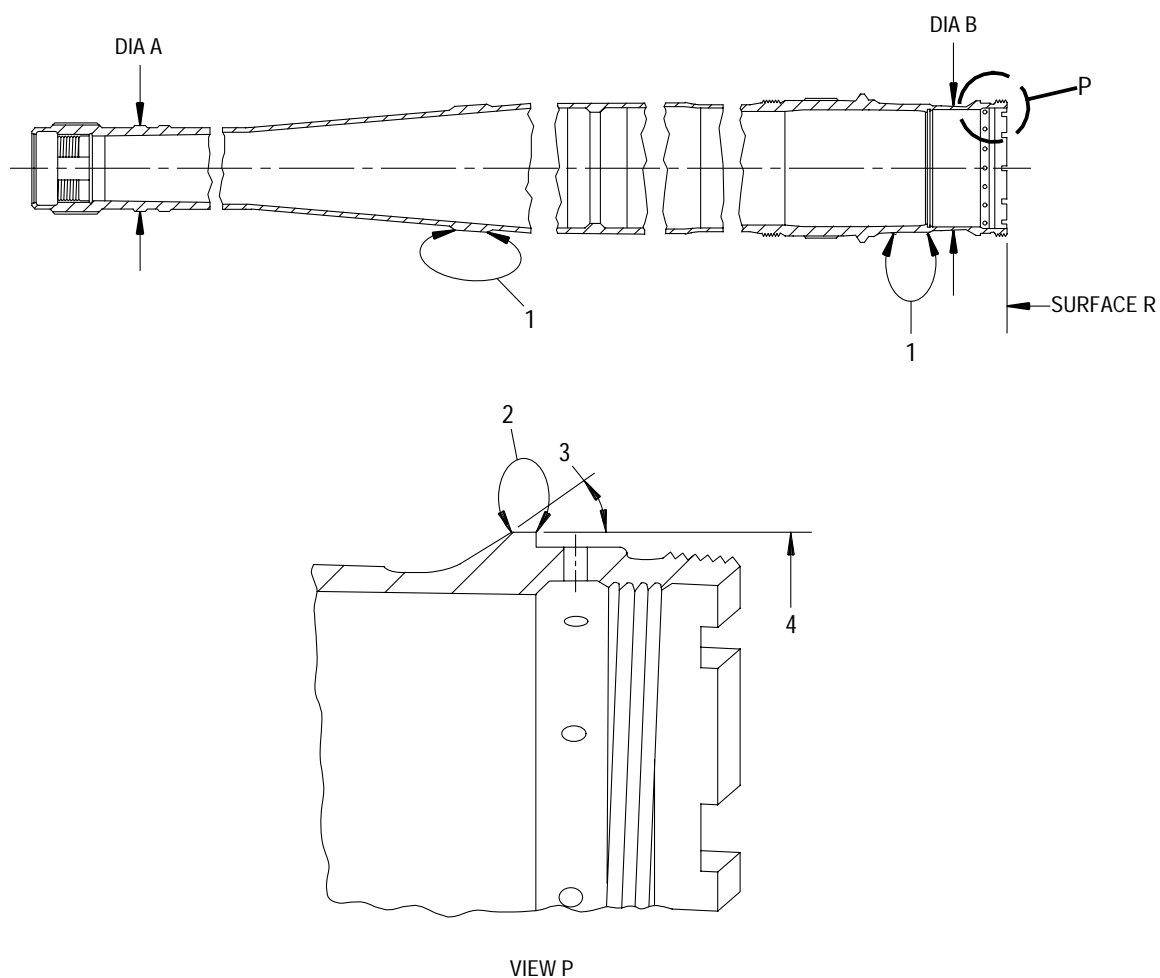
Front Compressor Drive Turbine Shaft - No. 5 Bearing Heat Shield Front Snap Diameter Repair
